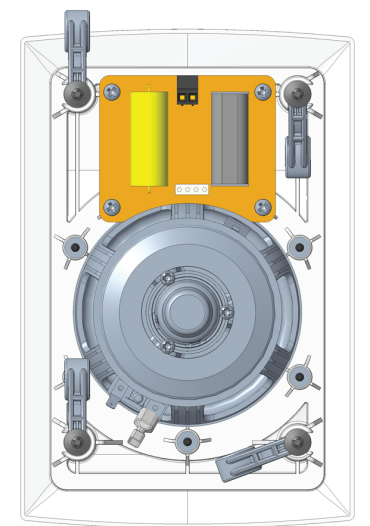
Clamps in the pre-install position (iW 4DC shown)
